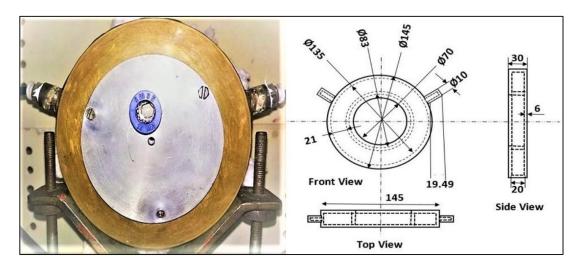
Picture of flange and its drawing (All dimension are in mm)
